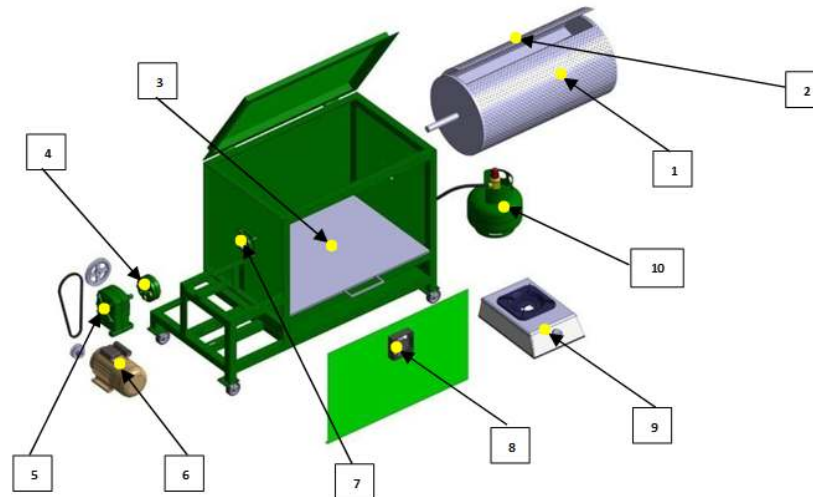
Schematic of LPG energy rotary dryer. 1. Rotary cylinder, 2. Rotary cylinder cover, 3. Heating plate, 4. Gearbox connector, 5. Gearbox, 6. Electric motor, 7. Bearing, 8. Exhaust fan, 9. Gas stove, 10. LPG cylinder
